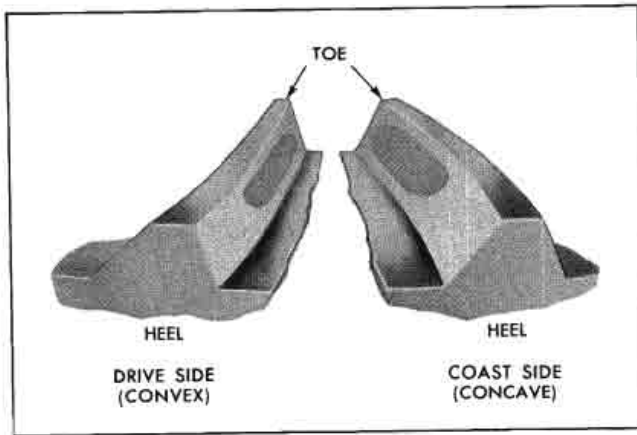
Desired Tooth Contact Pattern Under Light Load
